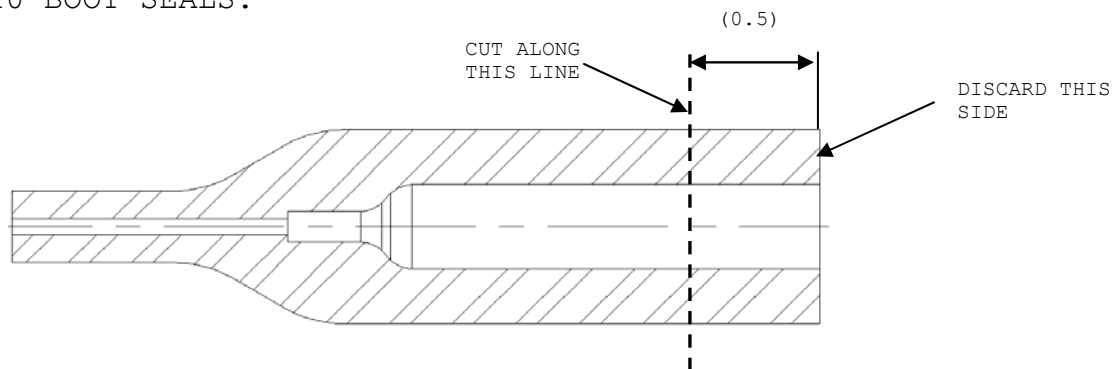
DIMENSIONS FOR MODIFIED BOOT SEAL
